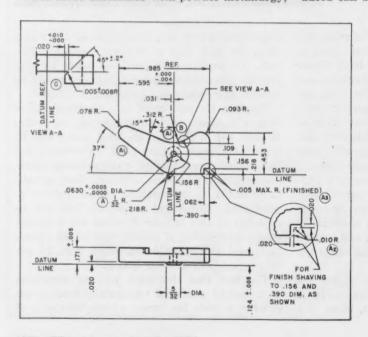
The close tolerances on the various surfaces of the tripflywheel appear on this drawing.
